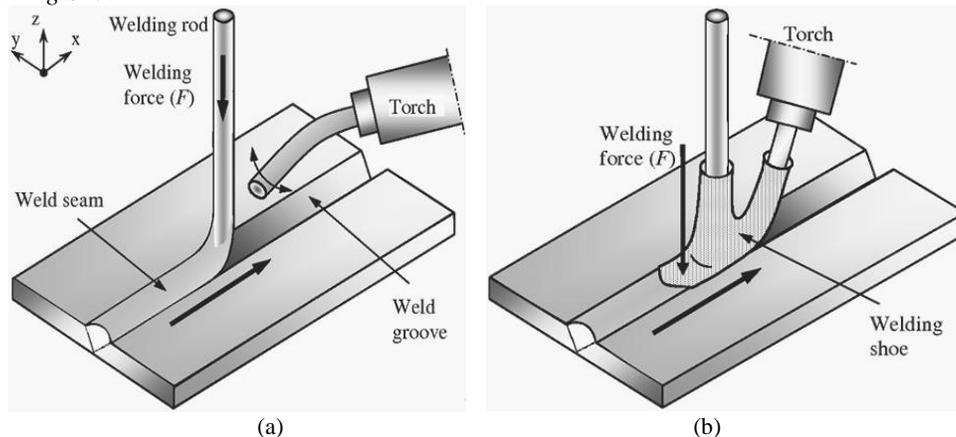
Schematic representation of hot gas welding; (a) Without welding shoe, (b) With welding shoe.
